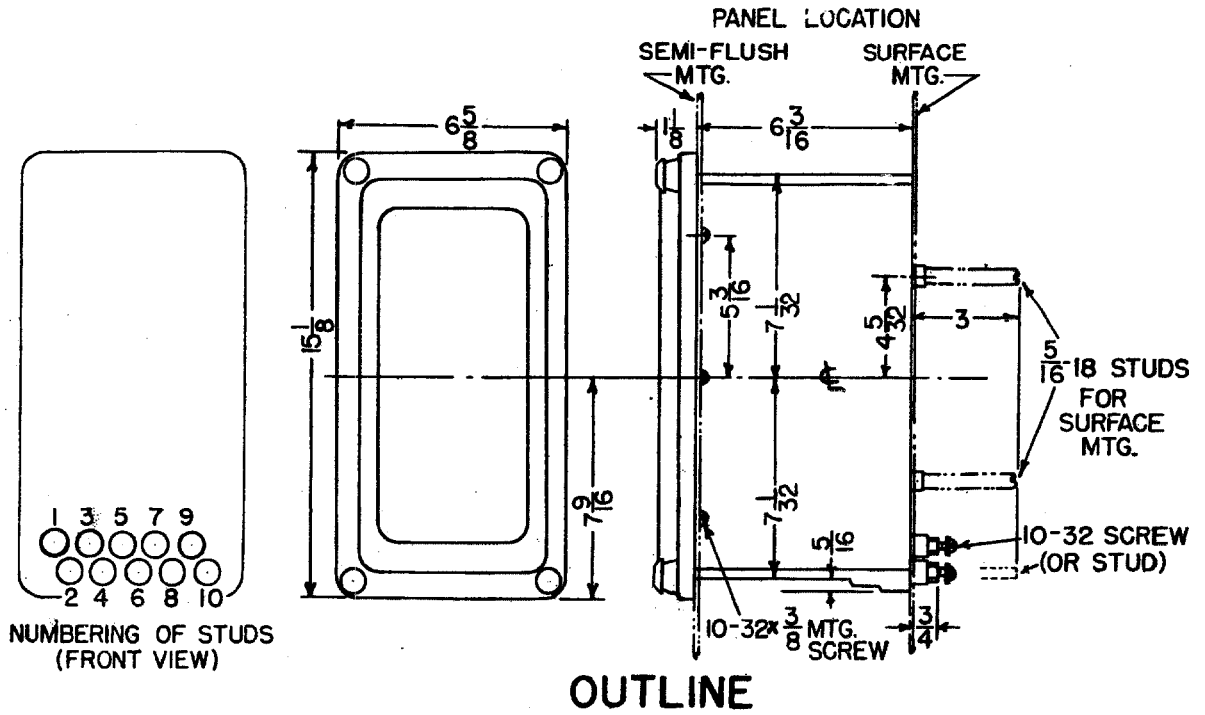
(K-6209273-2) Outline And Panel Drilling Dimensions For MI Case Used For Type SFF21A Relay
